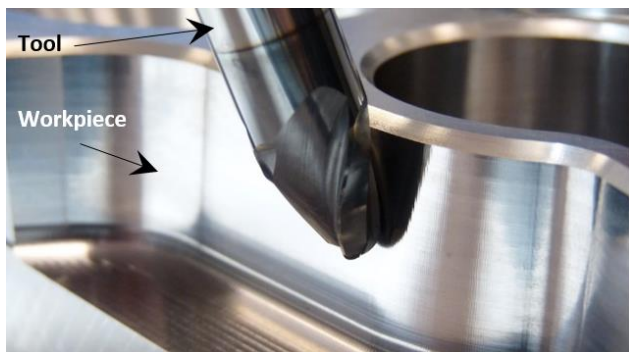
Machined Surface with a Taper Form of Circle Segment Cutter [Emuge Corp 2016].
